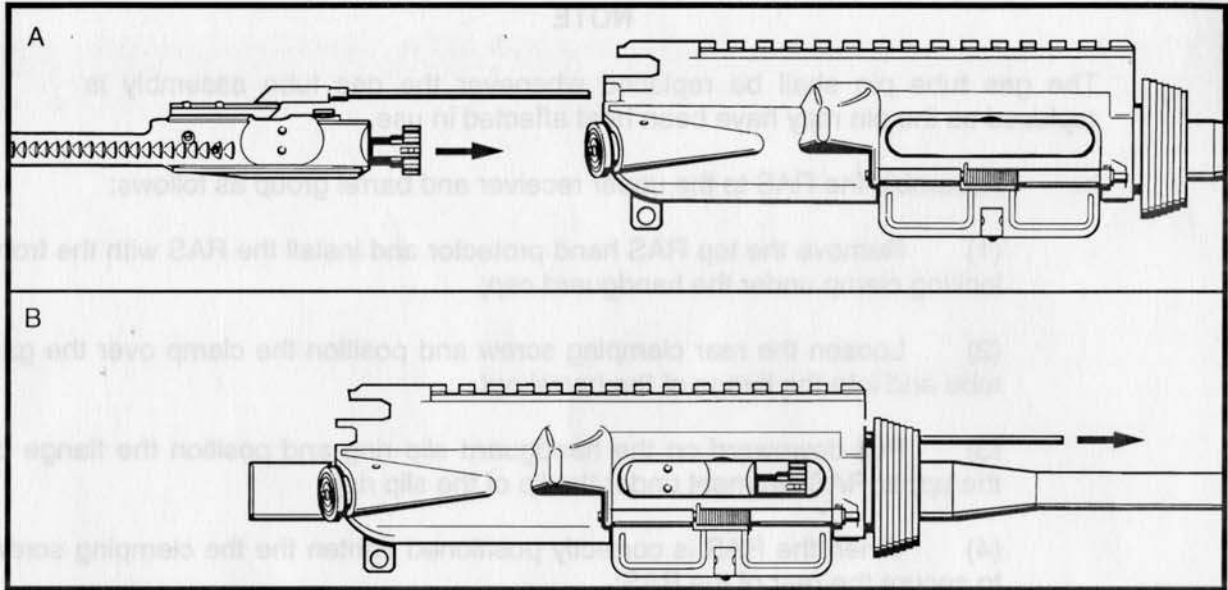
Using the Barrel Nut Alignment Tool
